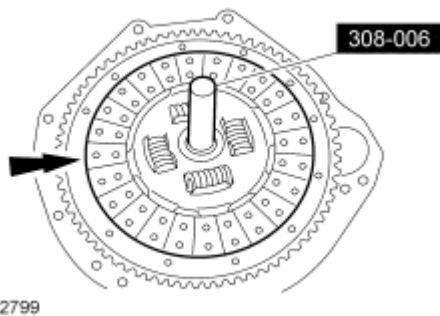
Using Special Tool (308-006) To Position Clutch Disk On Flywheel
